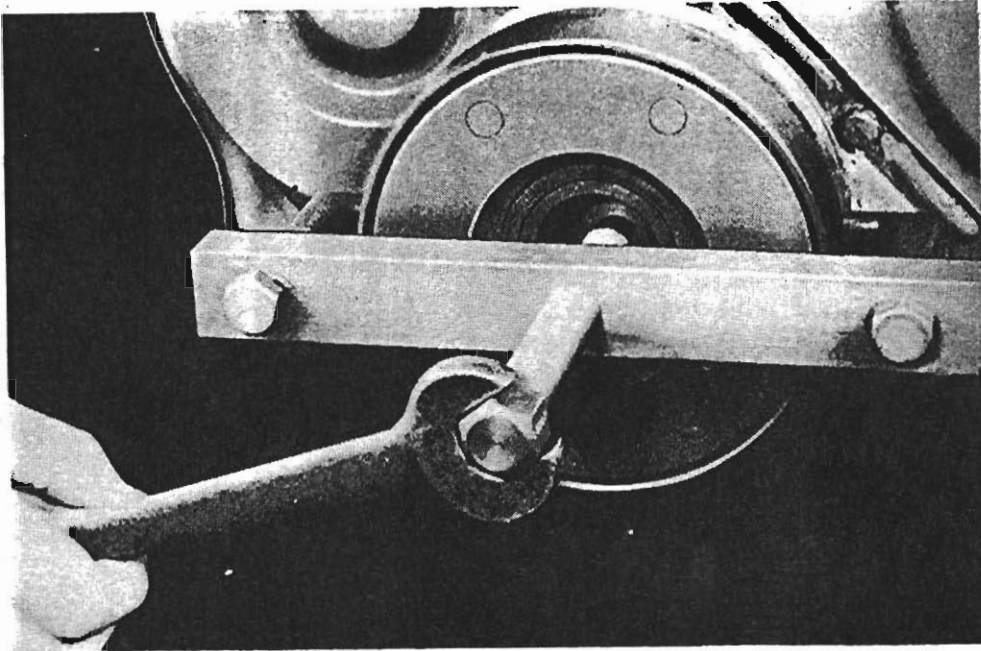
Vibration Damper Puller J-2582 Is Used to Remove Friction Disc Type Dampers.
